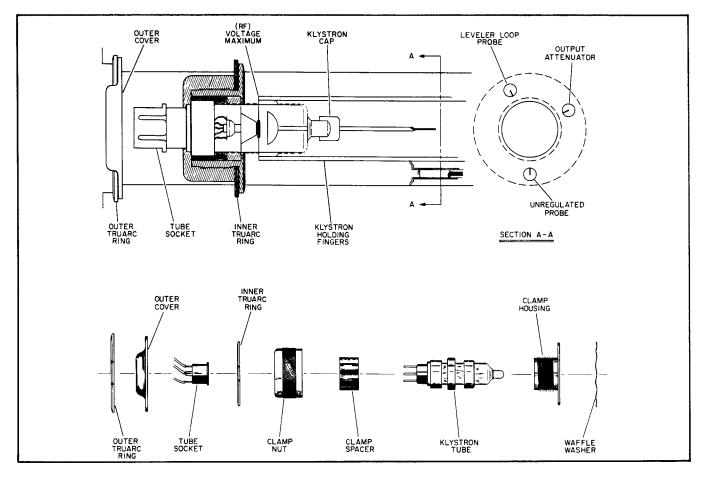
Cut-Away View of Klystron Cavity and Klystron Assembly
